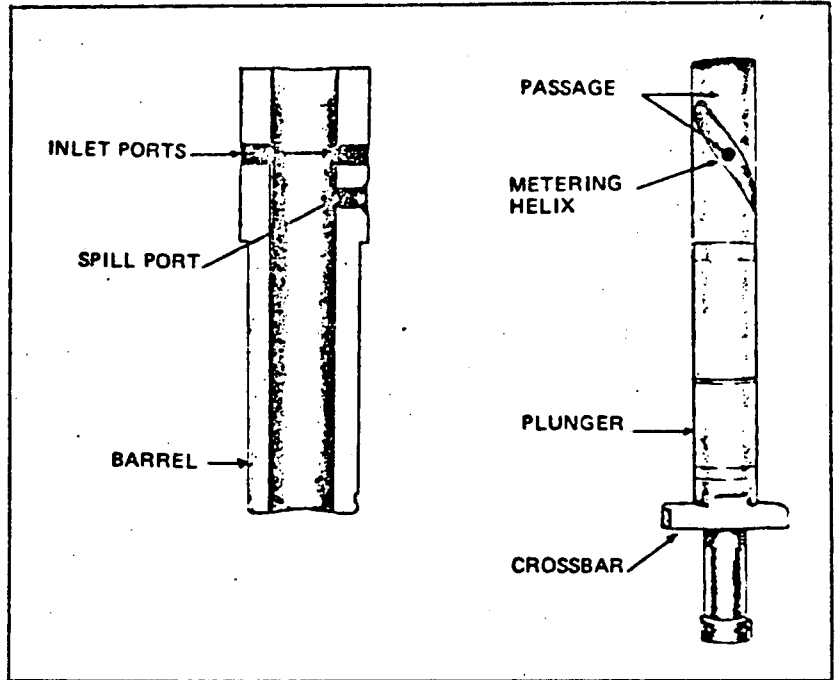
F-2. Pump Plunger and Barrel Arrangement
